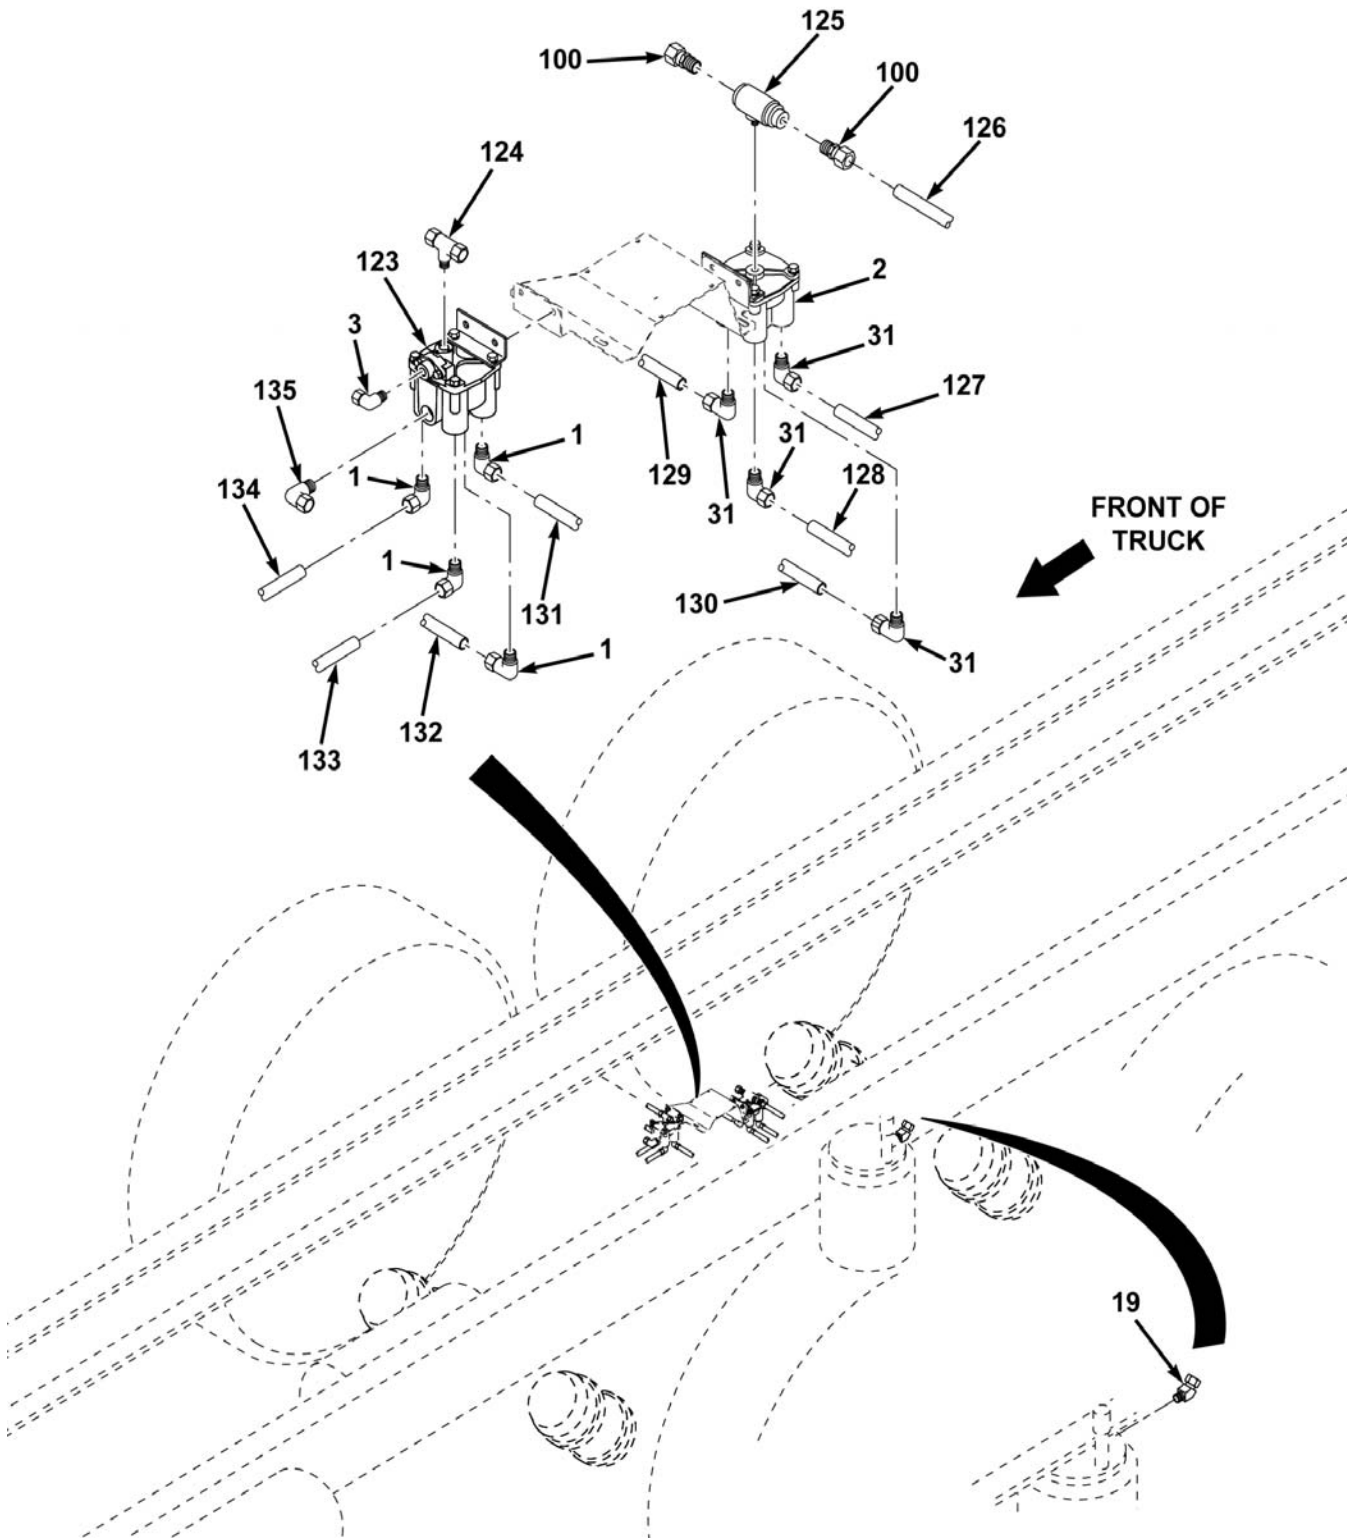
CHASSIS AIR (SHEET 7 OF 15)
